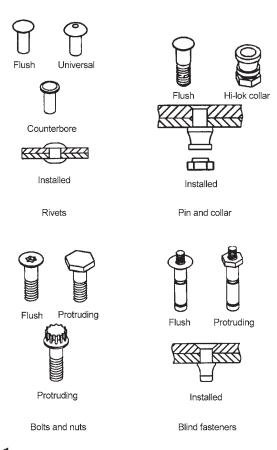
Typical structural fasteners. Source: Ref 8.1
